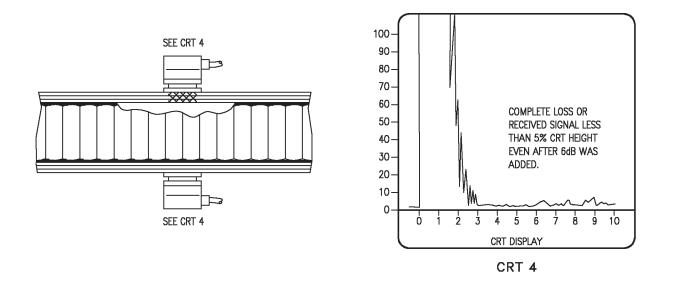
Typical Inspection Responses on Honeycomb Core Sandwich Assemblies (Sheet 2)
